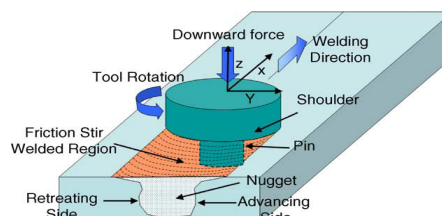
Schematic illustration of principle of friction stir welding^[10]
